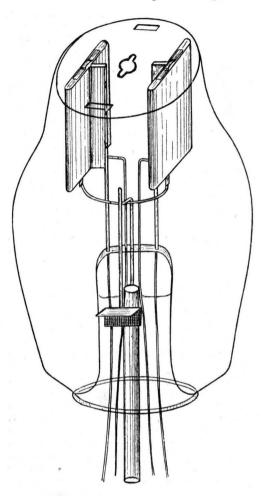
A TYPE 80 VALVE WITH ALL PARTS ASSEMBLED BEFORE EVACUATION.
